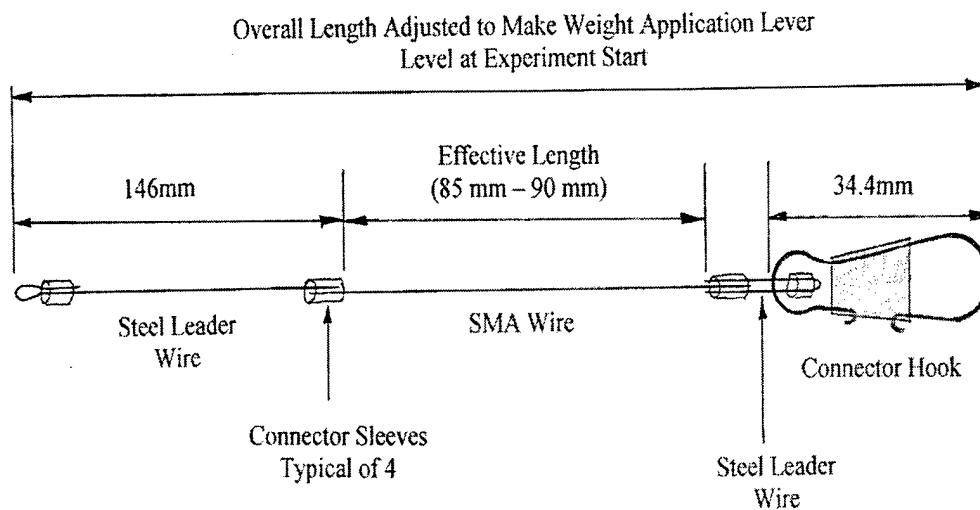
Shape Memory Alloy wire sample assembly as used in experiments.
